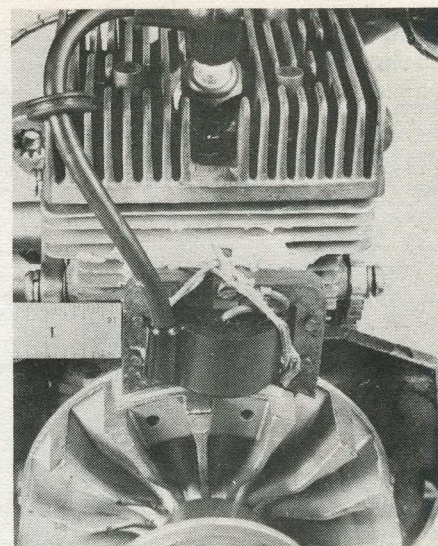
Ignition assembly showing proper position of the stator plate. Also, proper position of flywheel when points open. Note coil "T-job" and epoxy to reinforce stock stator plate.
